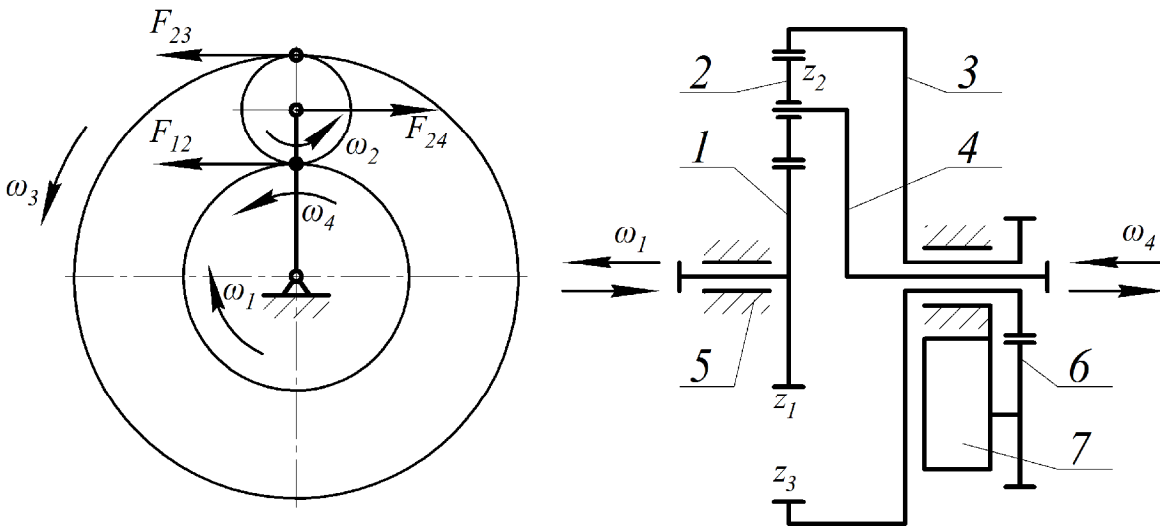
Scheme of single-row epicyclical gear train: 1 – sun gear; 2 – satellite; 3 – ring gear; 4 – carrier; 5 – frame; 6 – gearing; 7 – closed circuit hydrosystem
